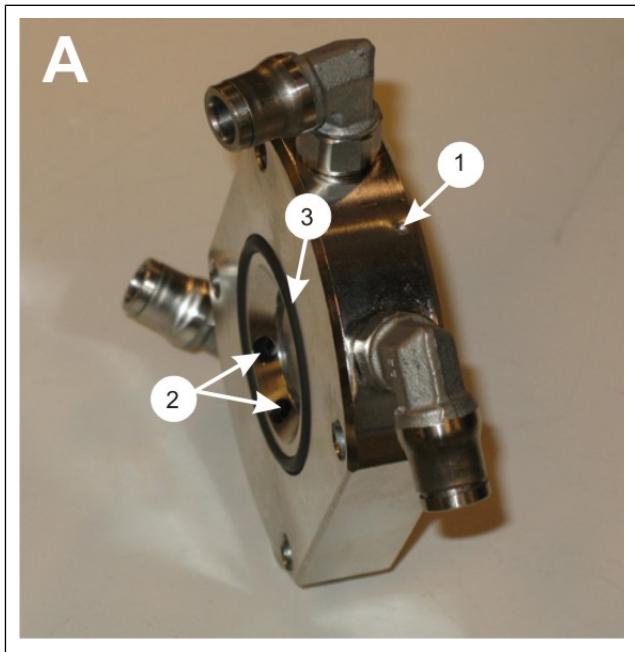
Shive screen assembly: 1. hole direction indicators, 2. air holes, 3. O-ring.
